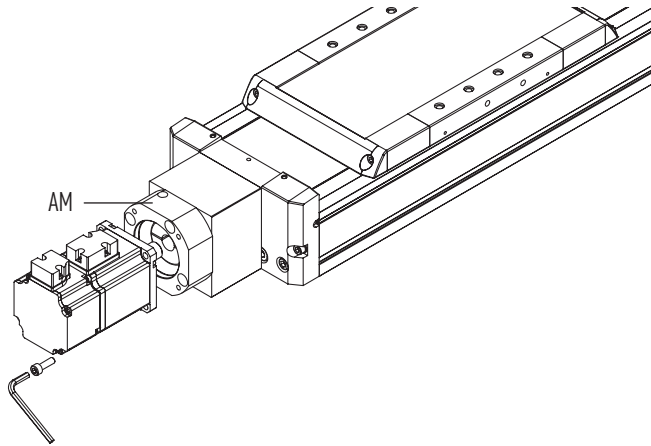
Bolting the motor to the linear table HT-S
